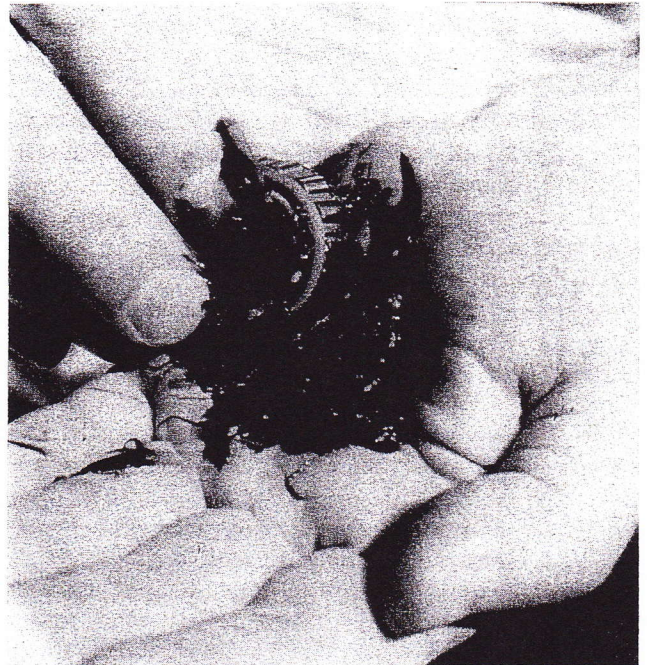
B. Lubricating a Front Wheel Bearing by Hand.
